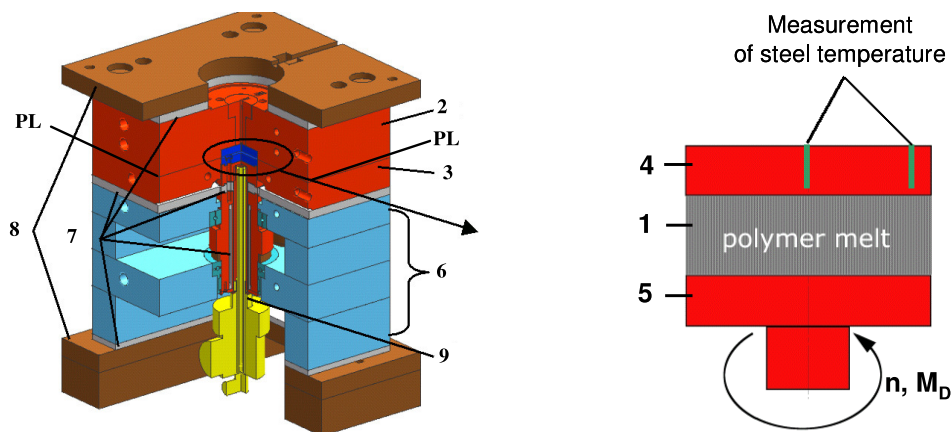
left, partial view of the new developed corrosion-testing apparatus [7]; right: measurement cell; 1 polymer melt, 2 upper mold plate, 3 lower mold plate, 4 metal specimen, 5 rotor head, 6 low temperature area, 7 insulating polyimide plates and sleeves, 8 mold mounting plates, 9 rotor; PL parting line
